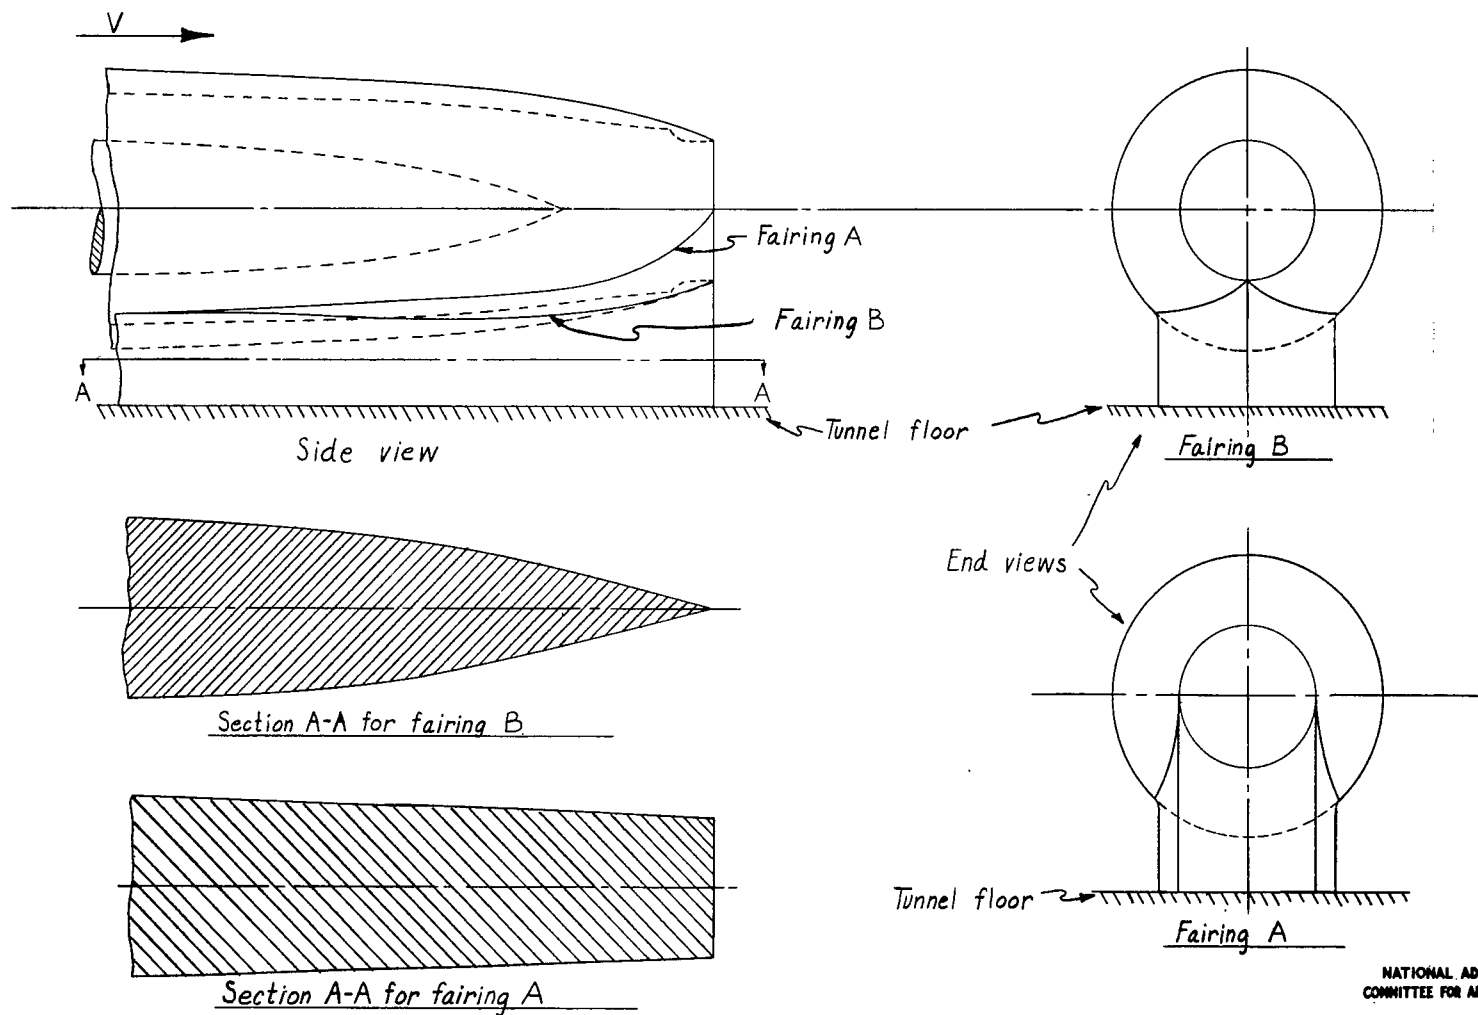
Sketch showing details of fuselage-tunnel wall fairings tested at Göttingen (reference 3).
